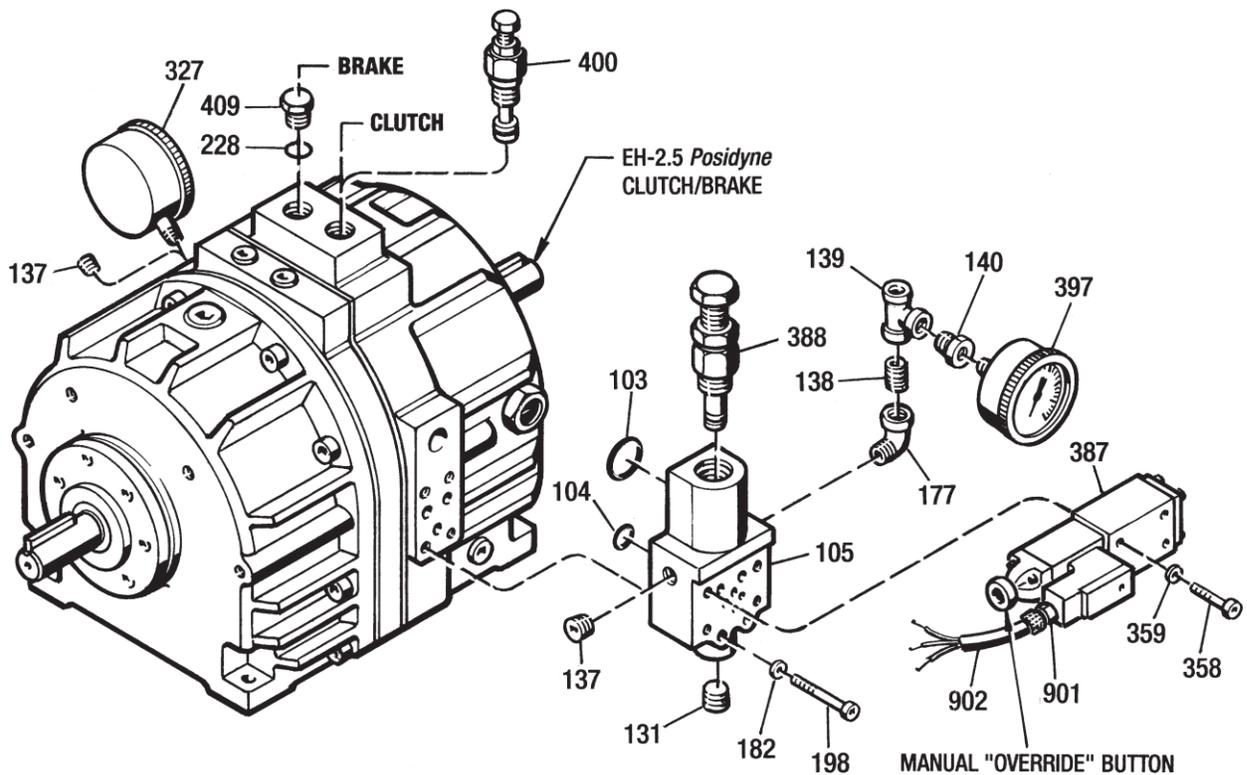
Positioning Encoder Assembly; Hydraulic Control Valves
